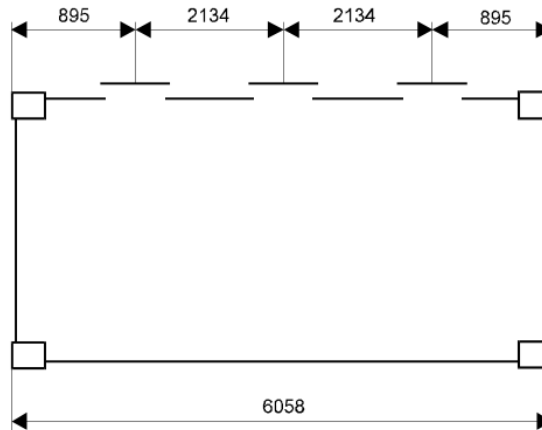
Examples of the arrangement of openings for loading dry bulk cargo in non-pressurized box type containers (continued)
